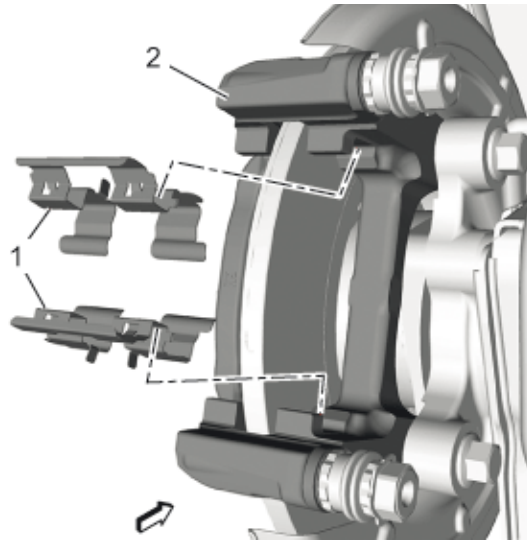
Brake Caliper Bracket And Brake Pad Springs
